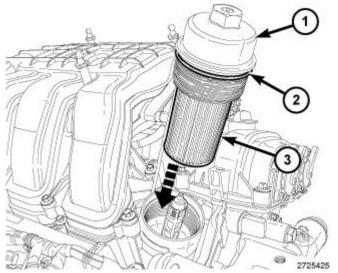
O-Ring Seal, Oil Filter Cap & Oil Filter Courtesy of CHRYSLER GROUP, LLC
